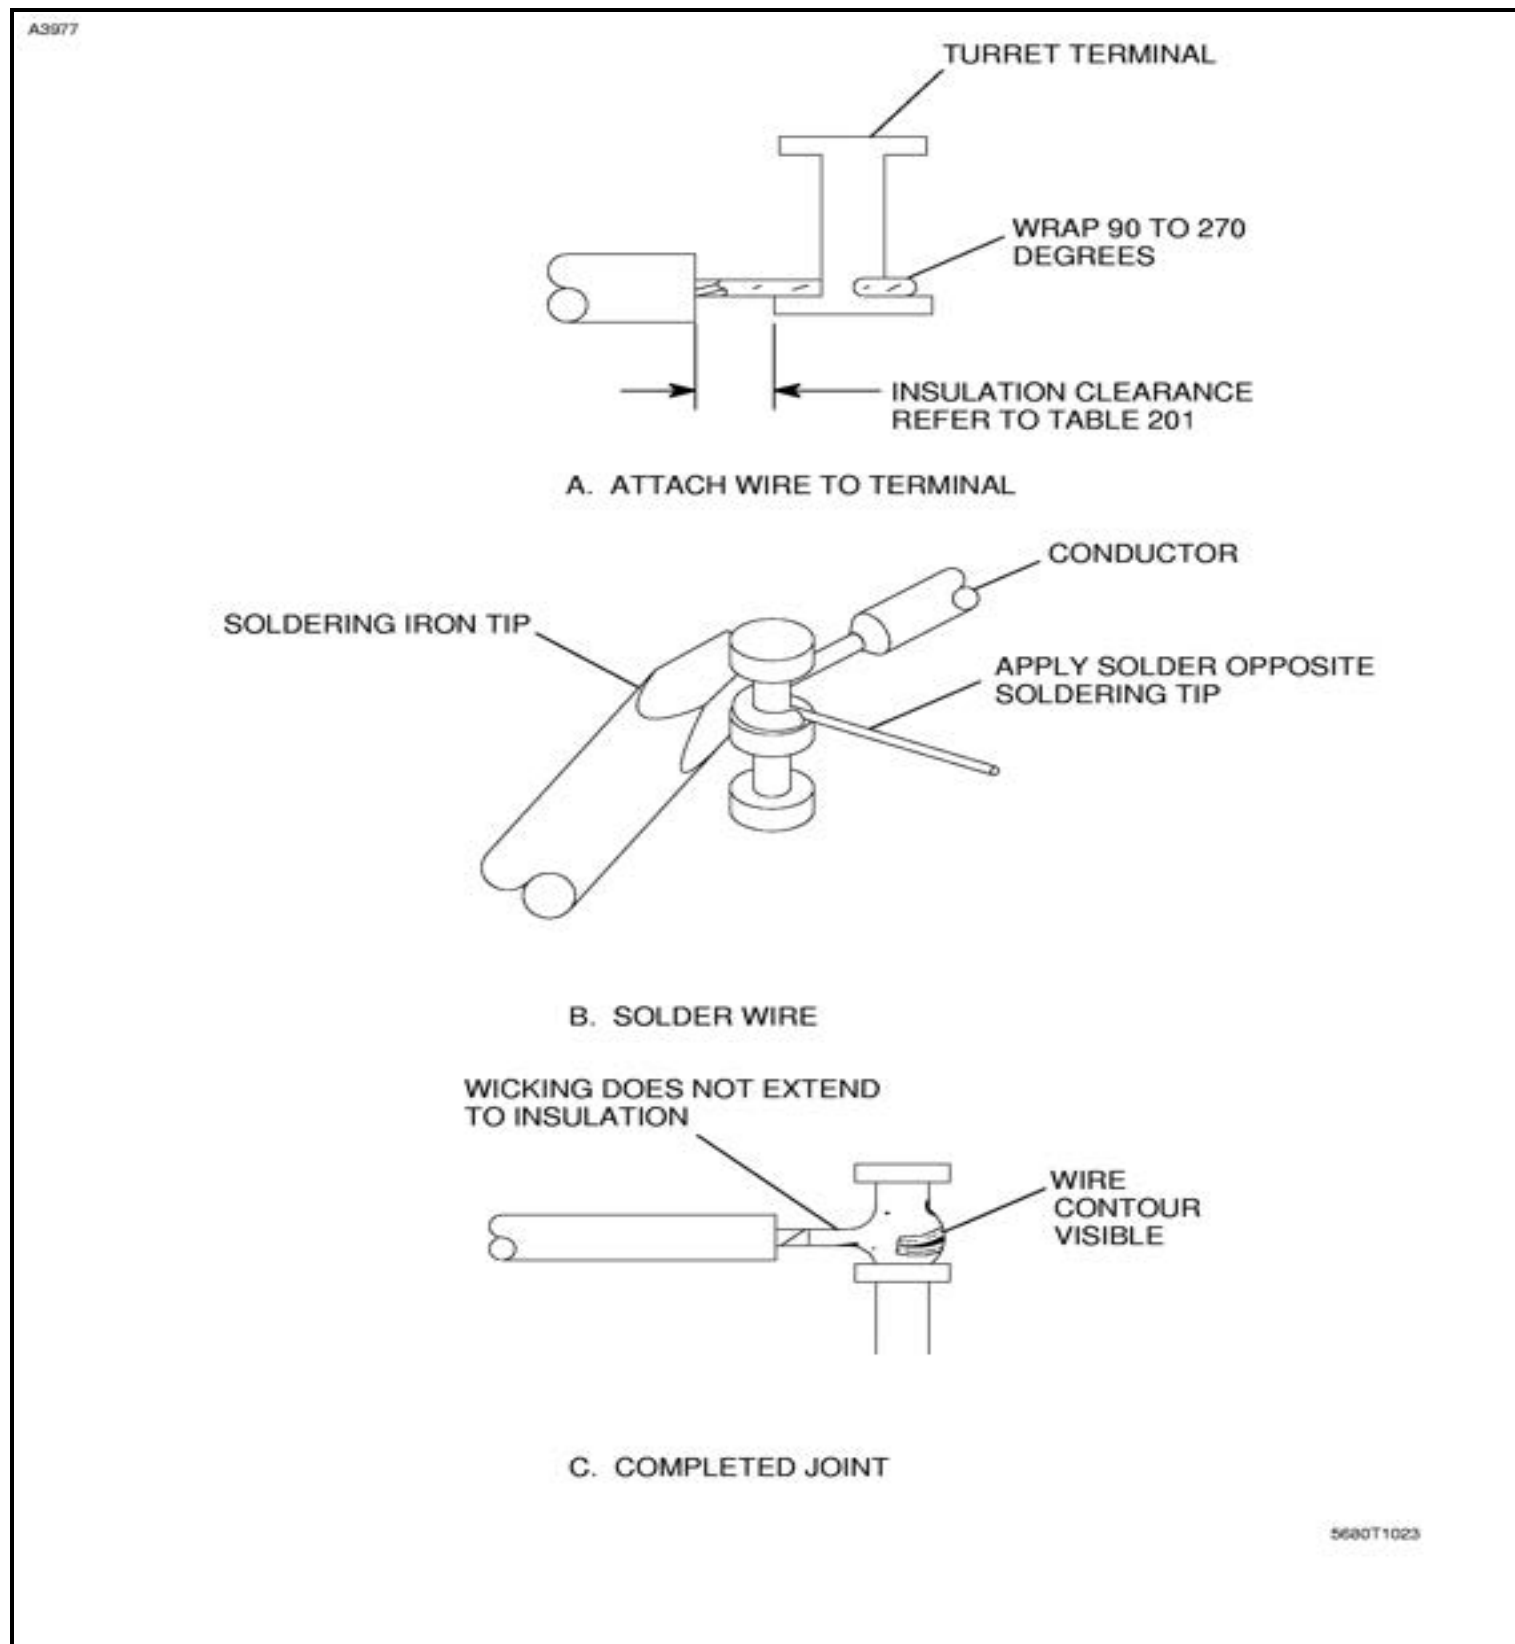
Sheet 1 : Installing Components on Printed Circuit Boards
